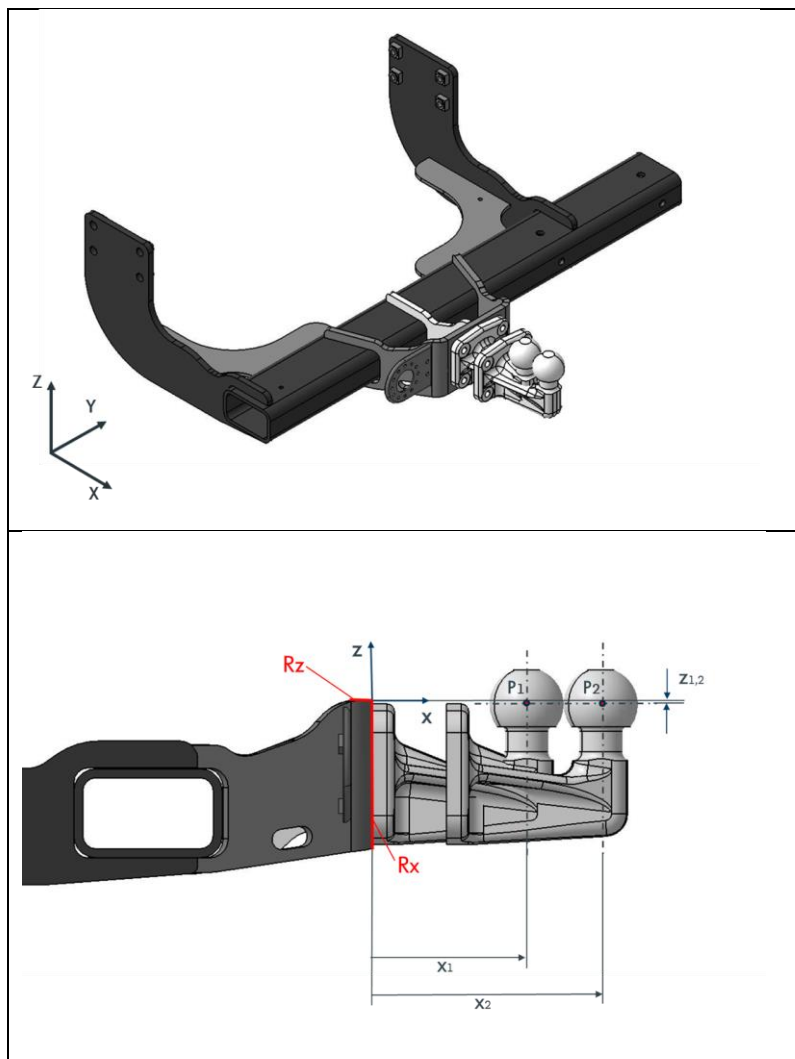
Position ball coupling: rigid towing bracket (P1) and removable towing bracket (P2)
